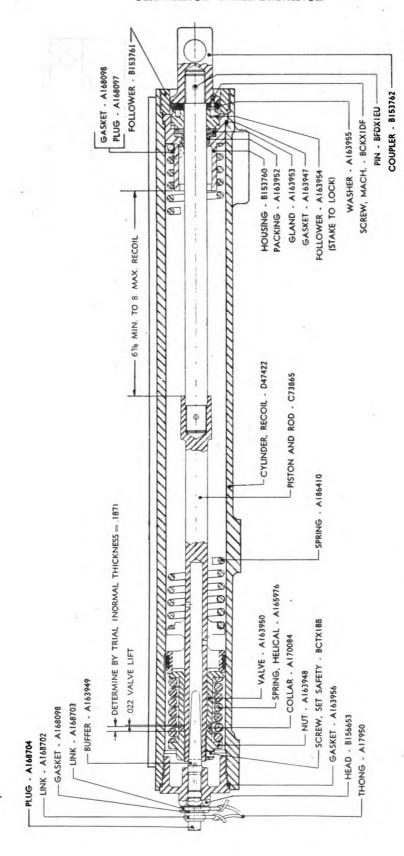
,-37-mm gun (tank) M6-recoil mechanism.
